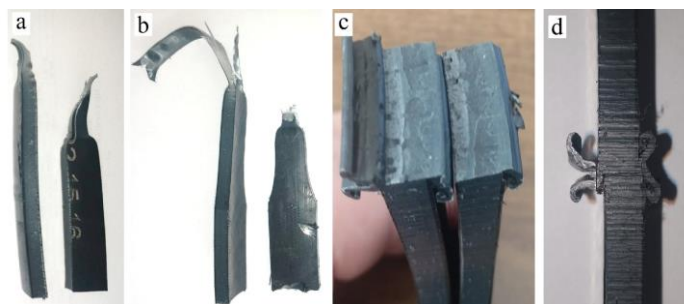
Tensile test specimens from: (a) unused material, (b) naturally aged material, (c) butt-welded, and (d) butt-welded specimens before the tensile test
